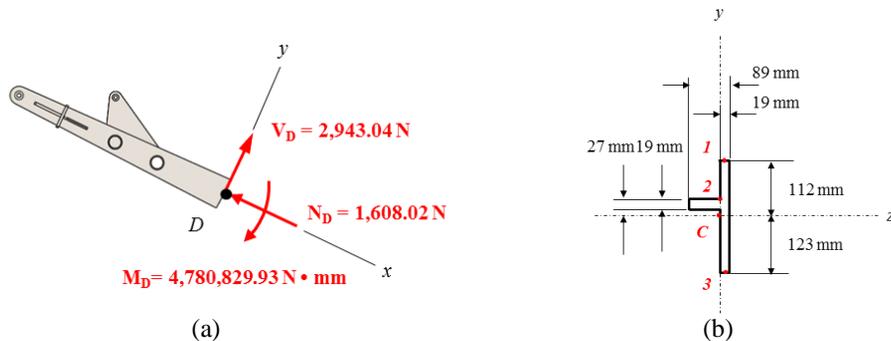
Cross-section D-D of loader arm, (a) forces acting on section, (b) Geometric section.
